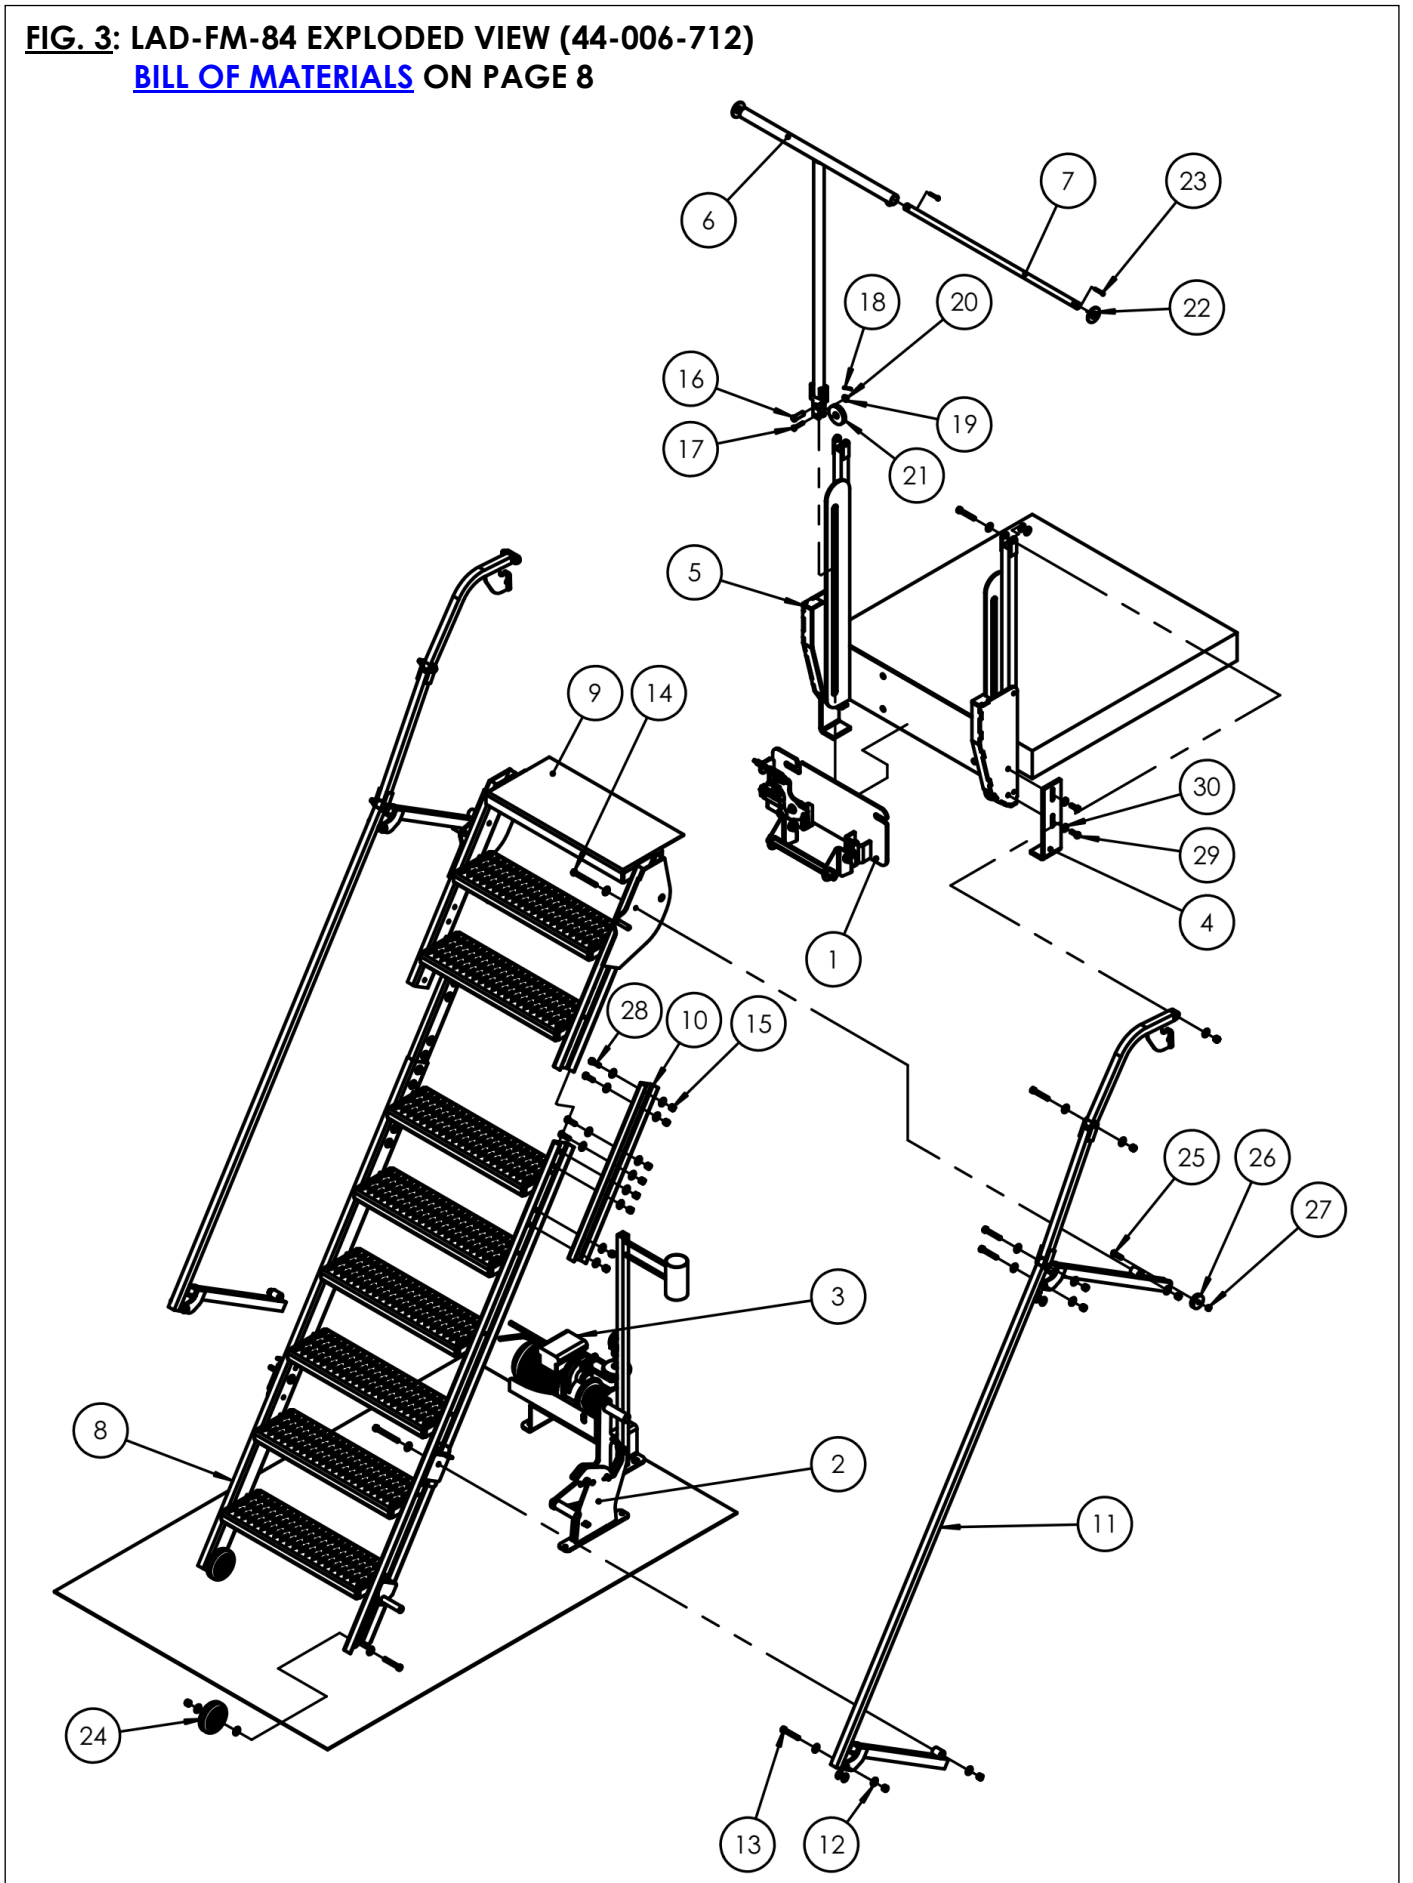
LAD-FM-84 EXPLODED VIEW (44-006-712)
